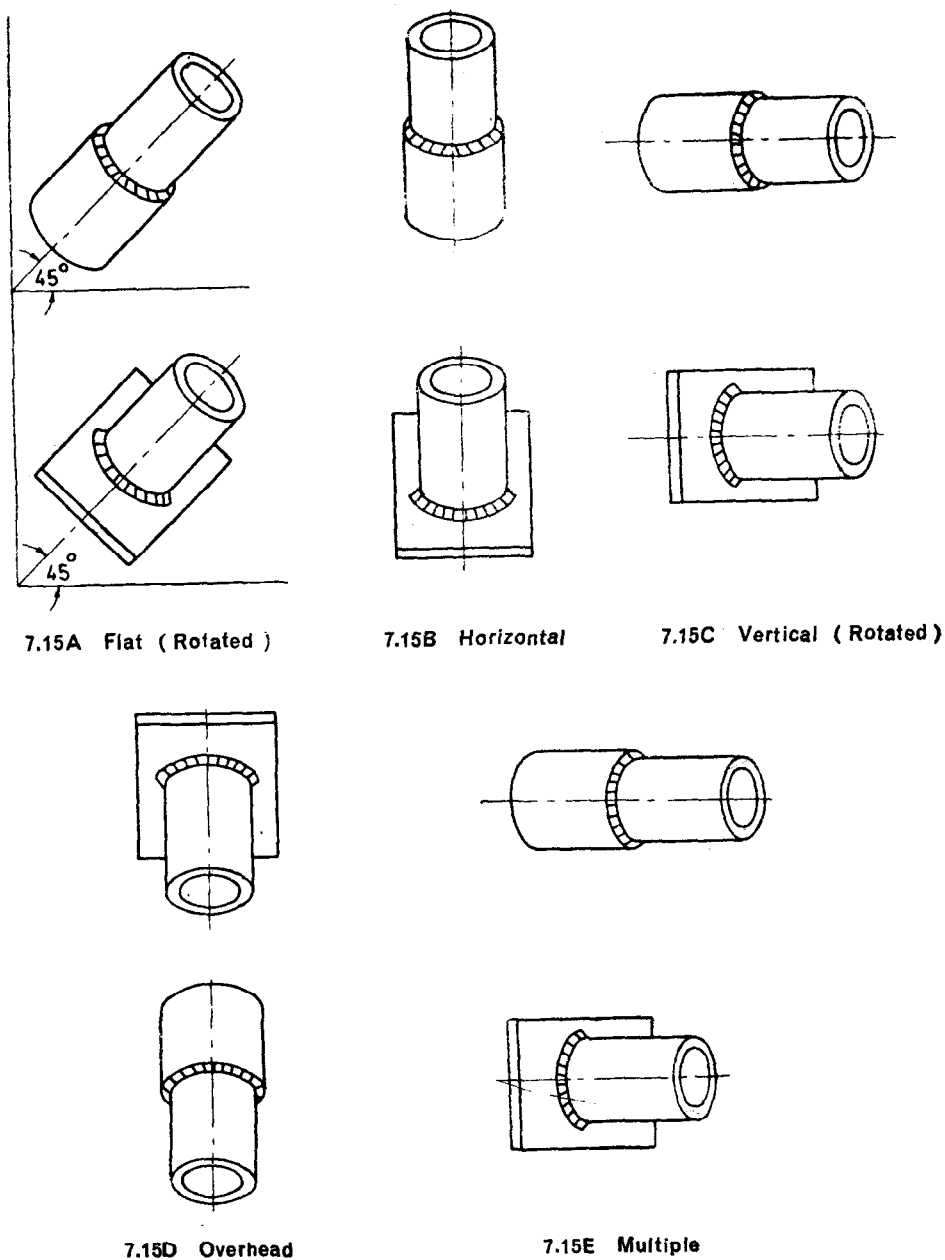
POSITIONS OF TEST PIPES FOR WELDER PERFORMANCE QUALIFICATION OF FILLET WELDS
